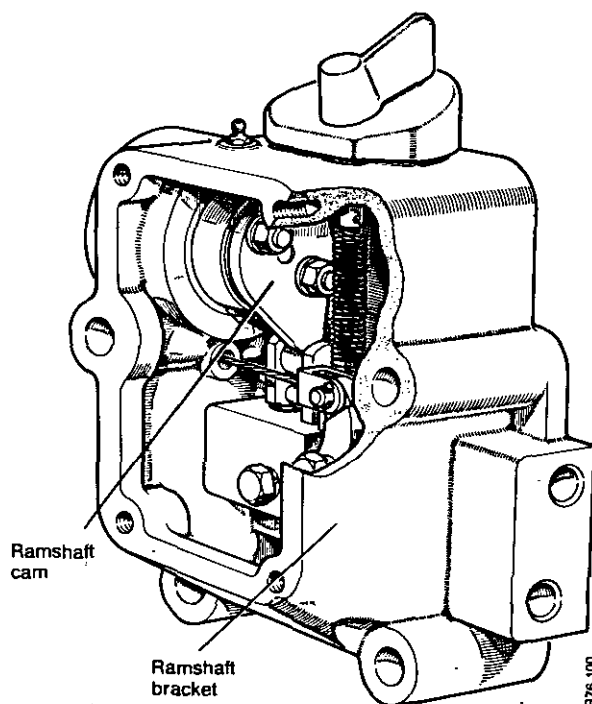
RIGHT-HAND RAMSHAFT BRACKET
